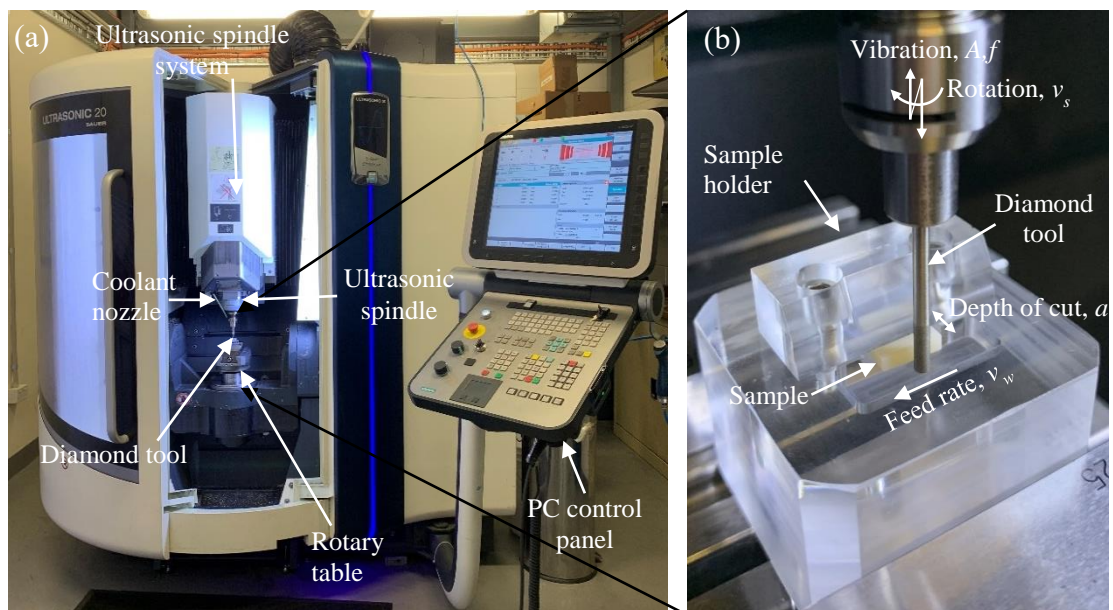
(a) Experimental setup for diamond machining with ultrasonic vibration assistance and (b) details of machining movements in diamond tool-zirconia sample contact.
